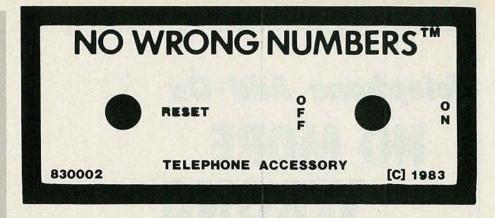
FOR SIMPLICITY, a PC board is used for the front panel. The foil pattern for that board is shown here.
